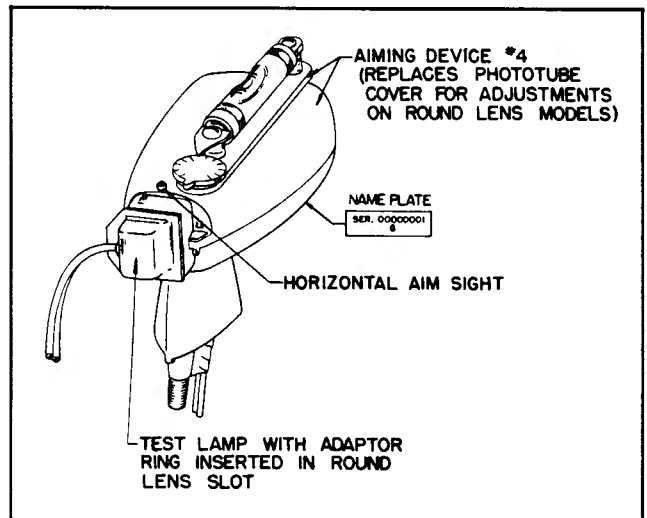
Test Lamp and Aiming Device Mounted on Phototube
